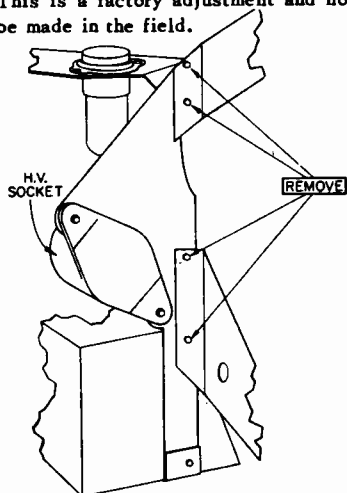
Bracket Screw Removal for PC Board Accessibility
